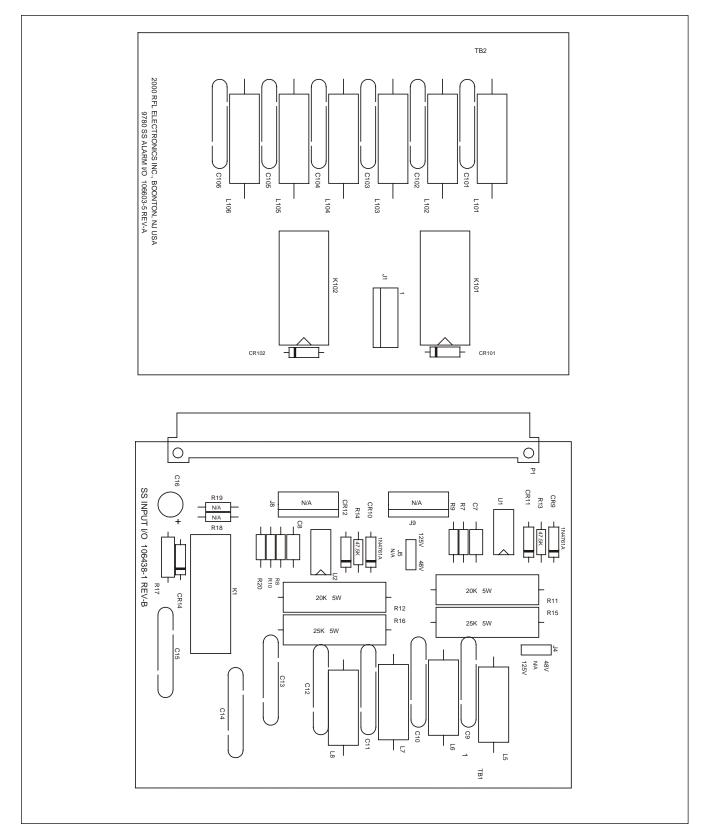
Component locator drawing, Input/Alarm I/O module. (Assembly No. D-106600-A)
